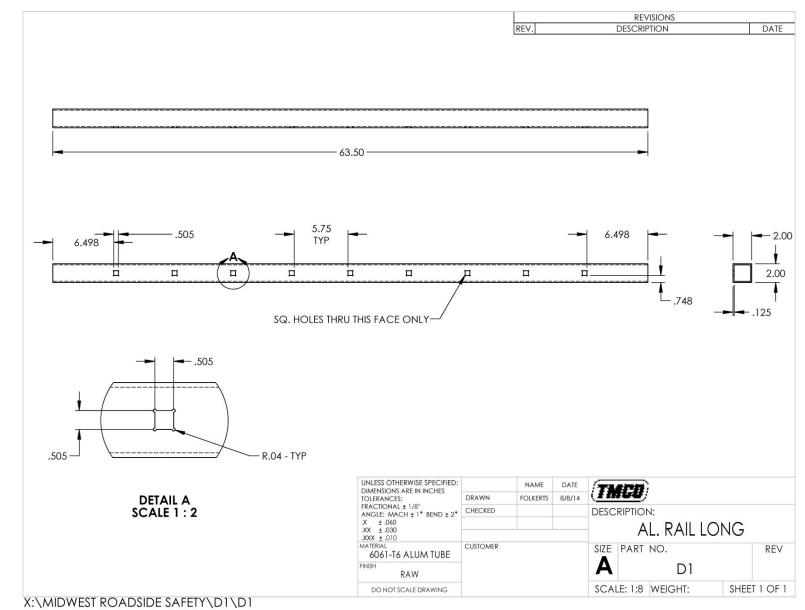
Fabrication Drawings, Test Nos. APR-1 and APR-2
